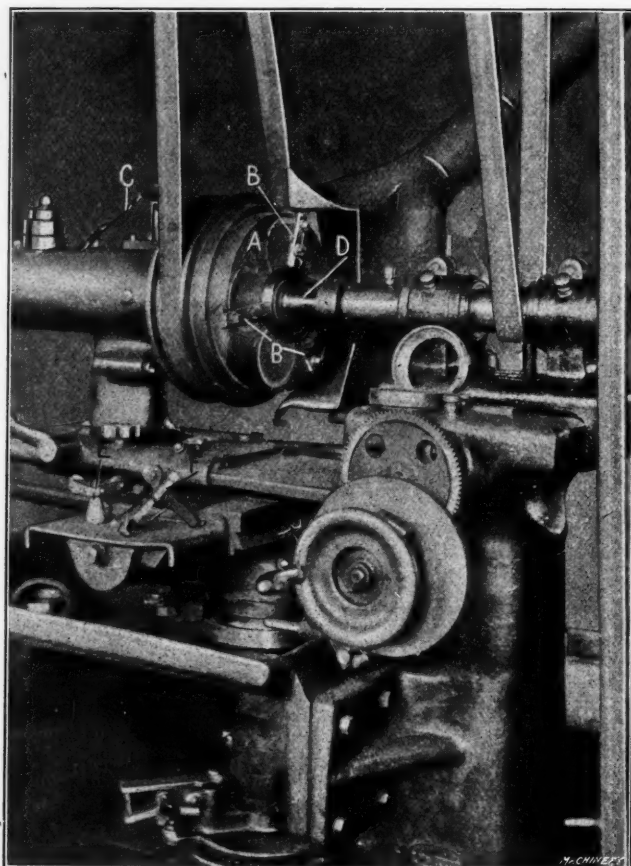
"Oscillator" Grinding Machine for Cup Races
